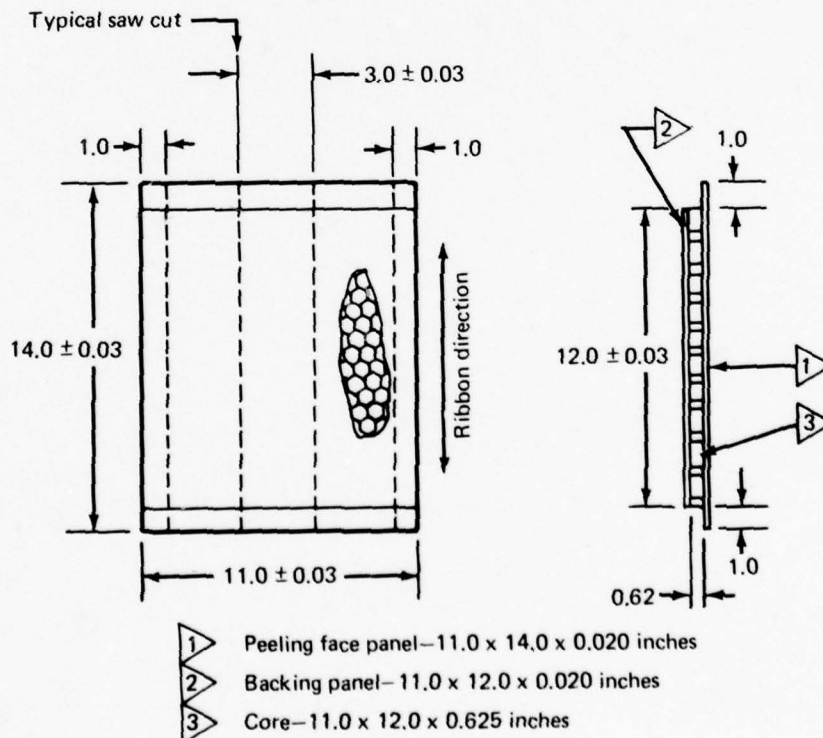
Honeycomb Peel Test Panel Assembly
